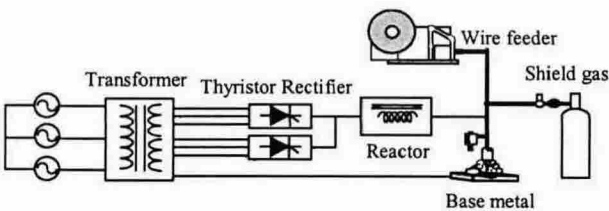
Schematic diagram of thyristor welding machine
